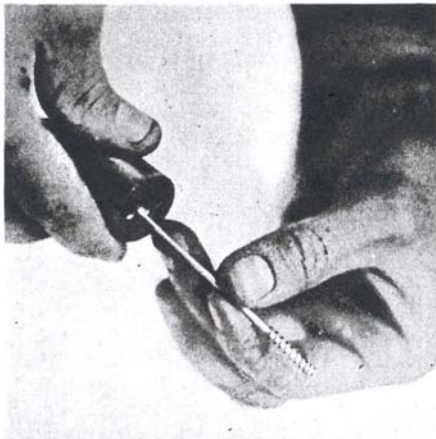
REFITTING THE TAPER NEEDLE IN THE VILLIERS CARBURETTOR
